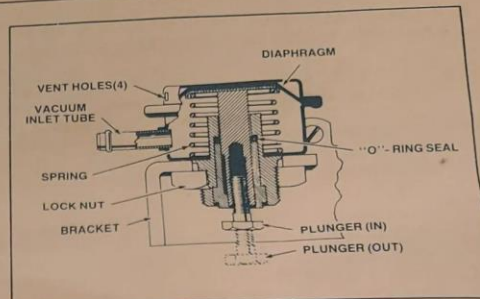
Throttle Lever Actuator (4.8L and 5.7L Gasoline Engines)
